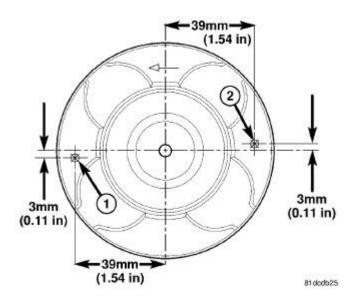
PISTON PROTRUSION MEASUREMENT Courtesy of CHRYSLER LLC
